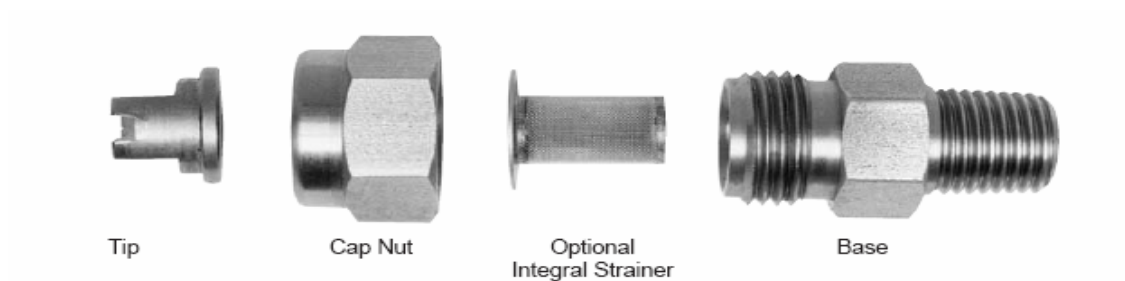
Various parts of a single BJ type nozzle. They are assembled to produce the final piece.
